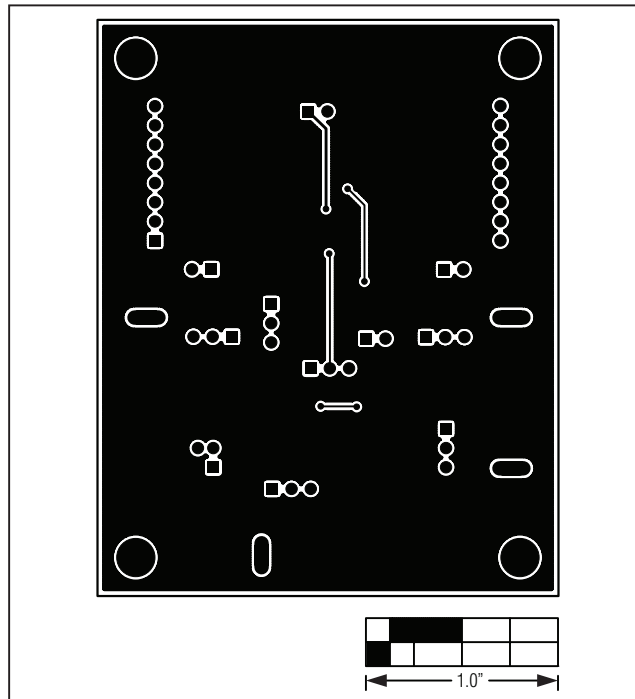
MAX13055E EV Kit PCB Layout—Solder Side
